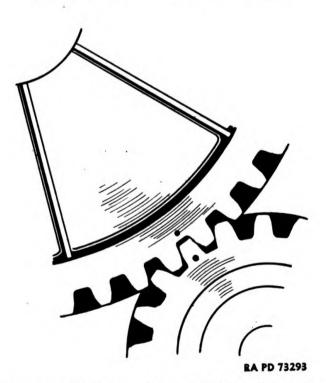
Proper Meshing of Crankshaft and Camshaft Gears
